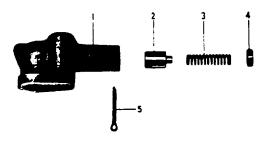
Exploded view of Oil Relief Valve. 1. Relief Valve Body.
